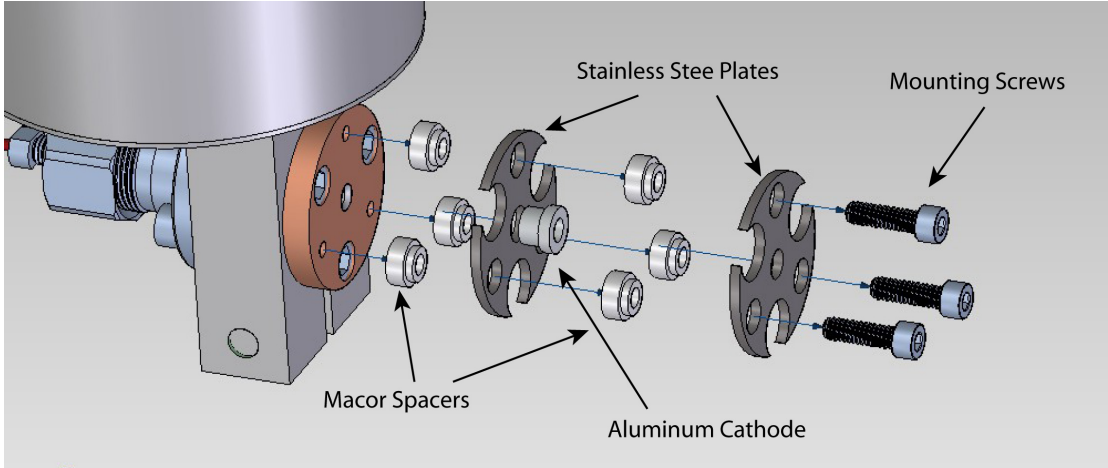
Schematic view of the DC discharge. The discharge is mounted on the front copper plate of the nozzle. Wire leads are spot welded to the stainless steel plates to provide high voltage and ground. It is held together with the mounting screws.
